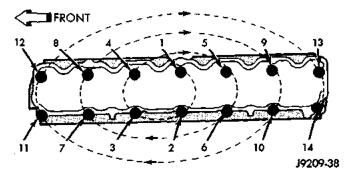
Engine Cylinder Head Bolt Tightening Sequence
